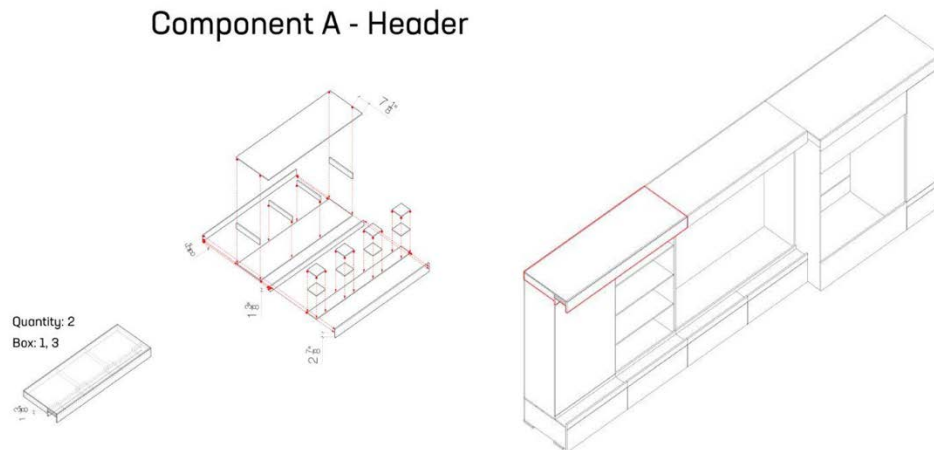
Assembly component exploded axonometric with location reference axonometric
